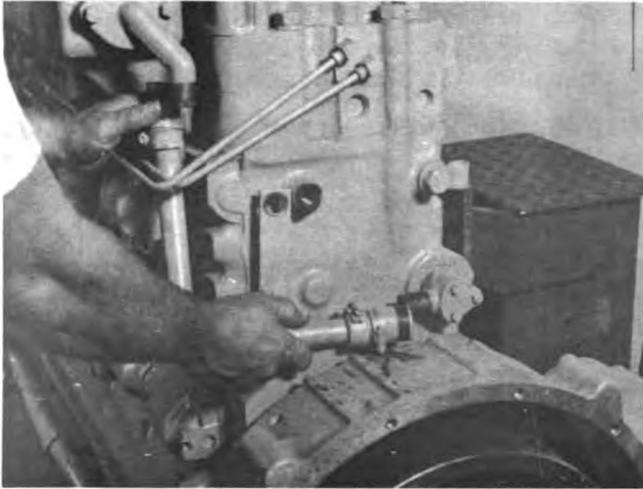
Remove The Tube From The Rear Of The Aftercooler.
